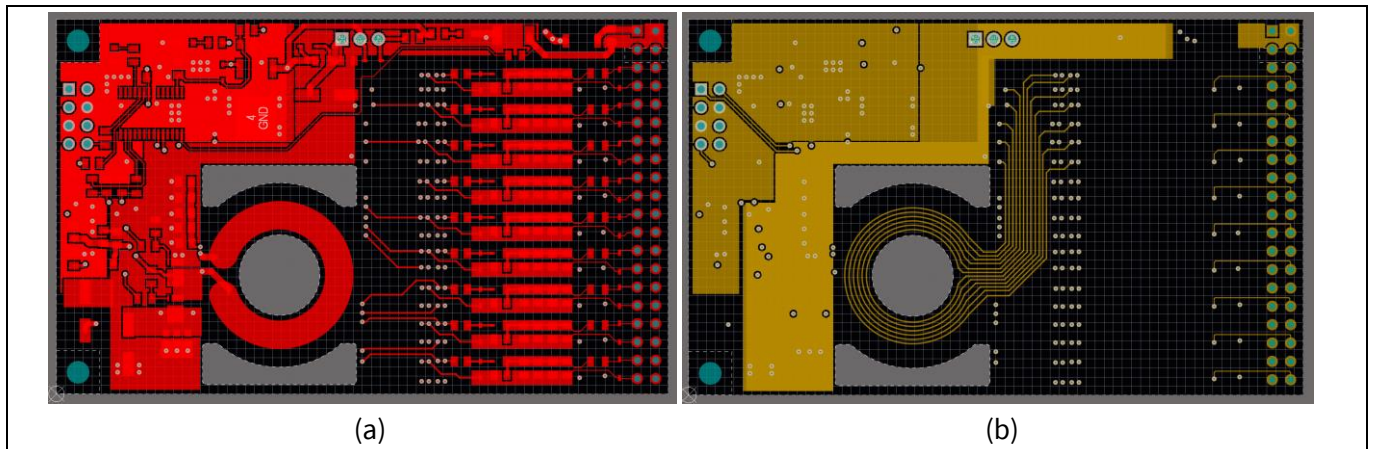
(a) Layer 1 (Top); (b) Layer 2 (Bottom)
